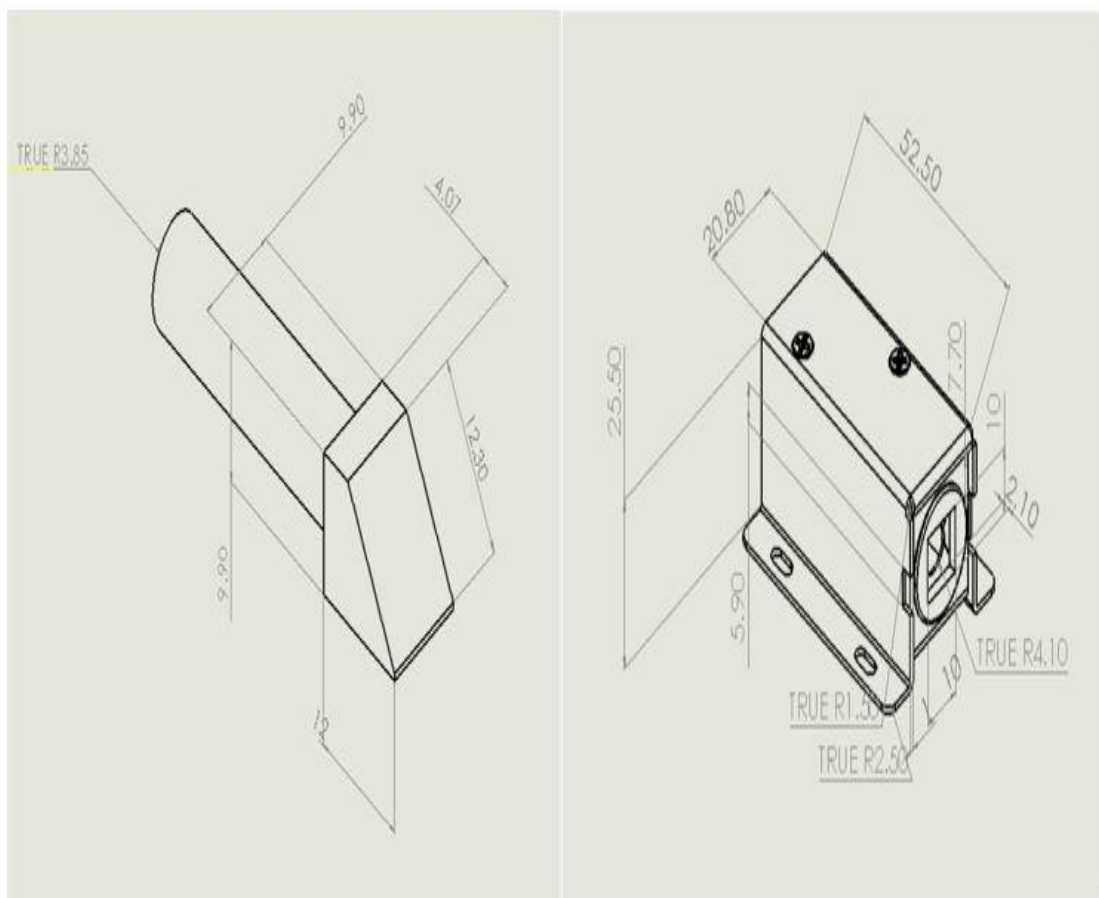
Dimensions of the parts of the Knee-Locking Mechanism
